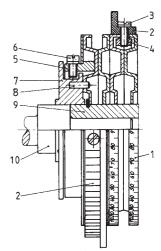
Cam Shaft with Clutch LNSE
